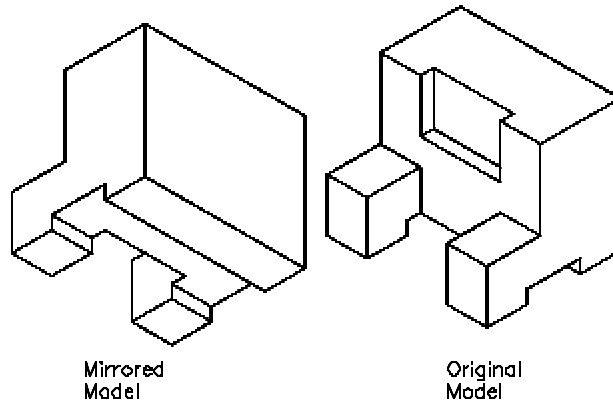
Figure showing the solid model mirrored using the View option and then isolated using the MOVE command
